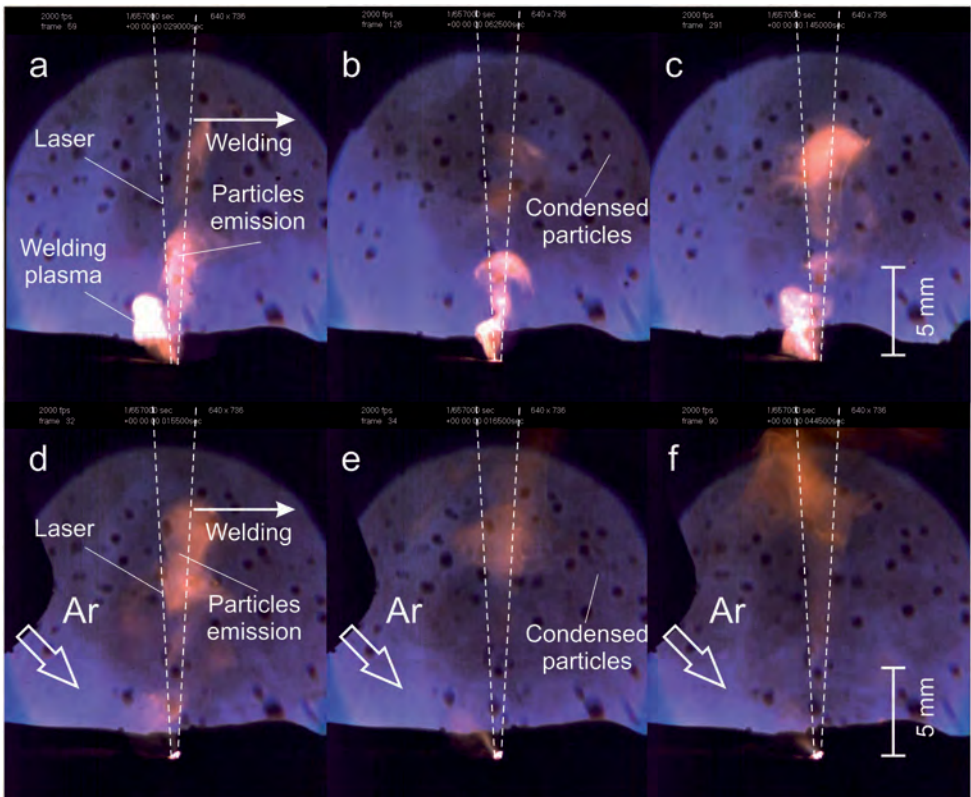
Disappearance of the welding plasma by Ar-supply: (a-c) – welding in air, (d-f) – welding under Ar
